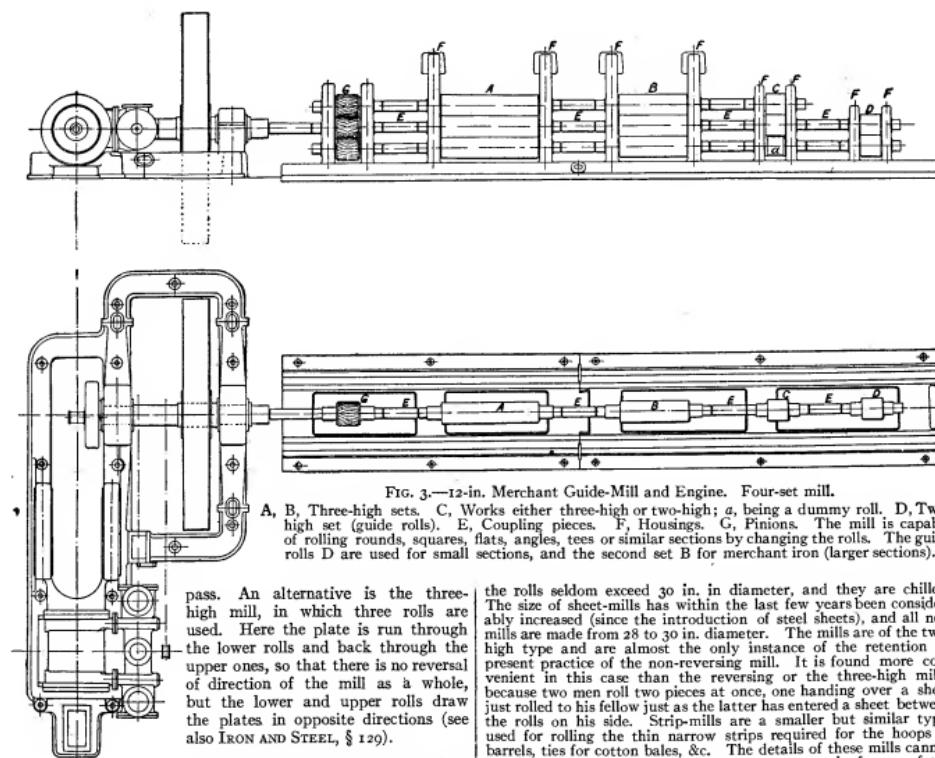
12-in. Merchant Guide-Mill and Engine. Four-set mill.
